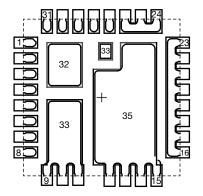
Multi - Phase VRPower Layout Bottom View
